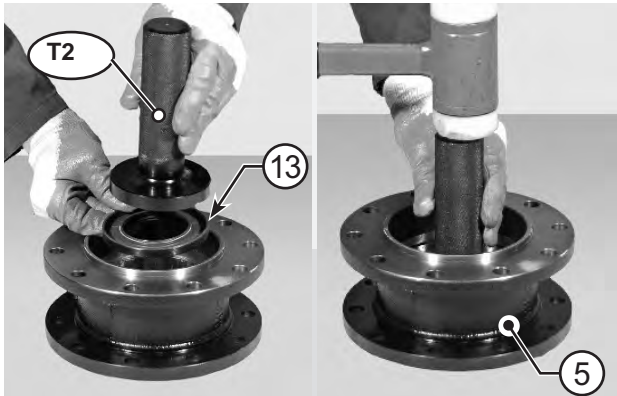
Lubricate the outer surface of the new sealing ring (13) and fit it onto the cover (5) using tool T2 (See drawing T2 p. 78) .
